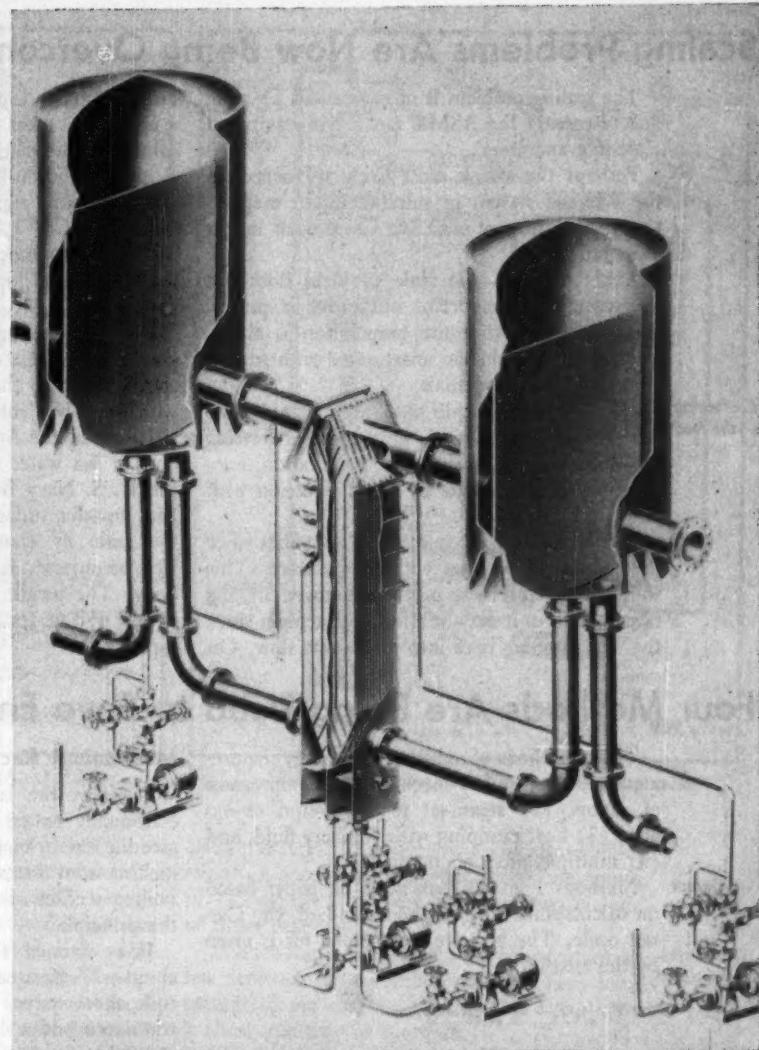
Cutaway view of a Rosenblad switching evaporator.
